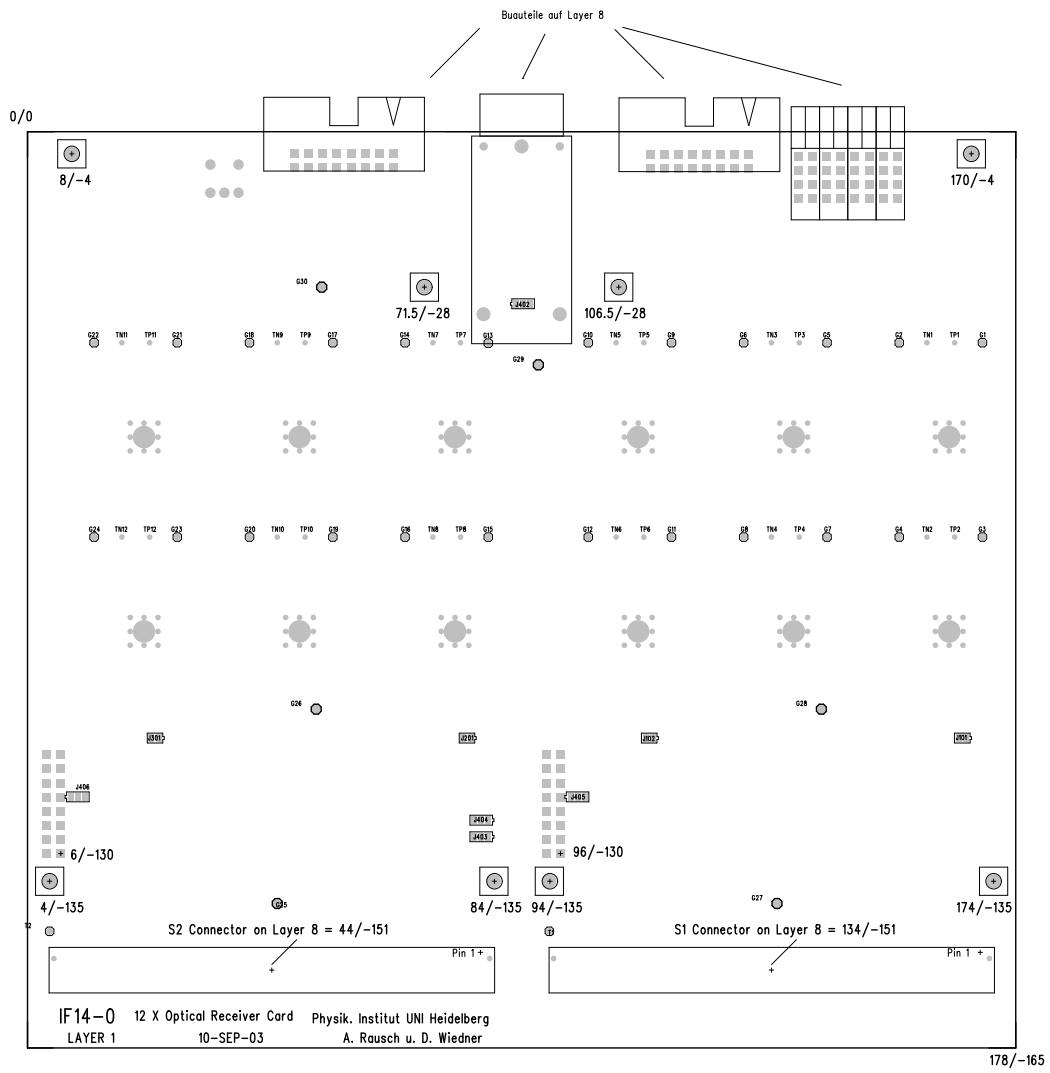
Mechanical dimension of the O-RxCARD, all dimensions use relative coordinates in mm from top left corner
